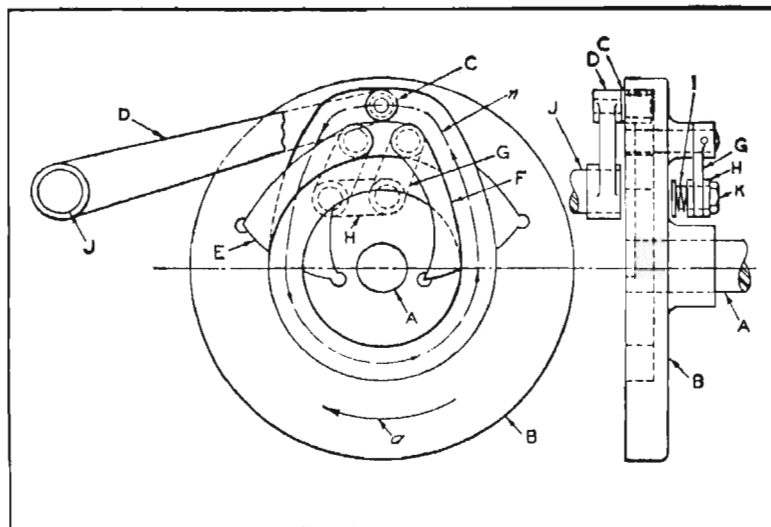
Cam Mechanism Designed to Raise and Lower Lever D on Each Alternate Revolution of Shaft A.
